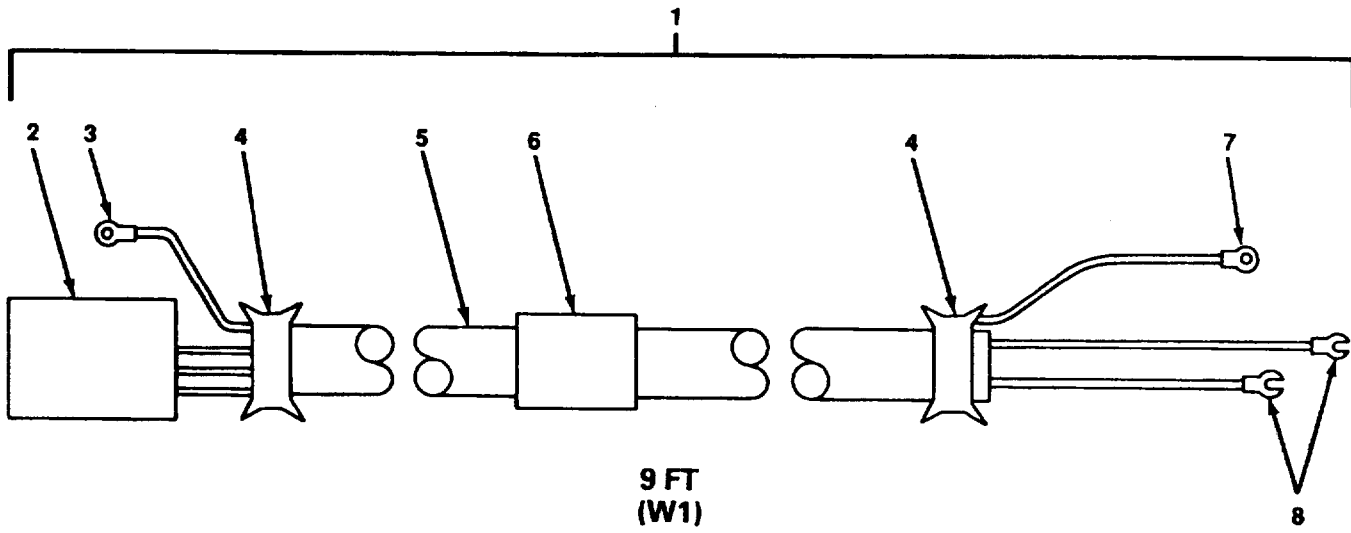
Cable Assemblies W1 through W6 (Sheet 1 of 3).
